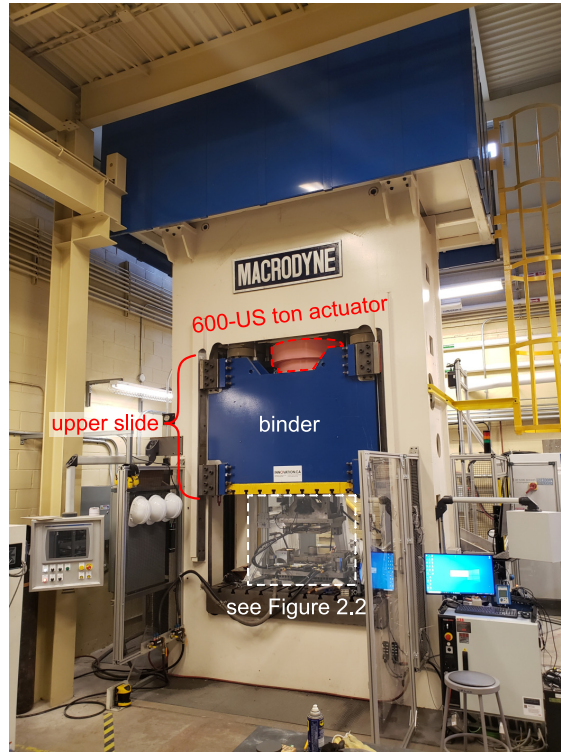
Custom, industrial grade hydraulic press used for hot stamping experiments.
